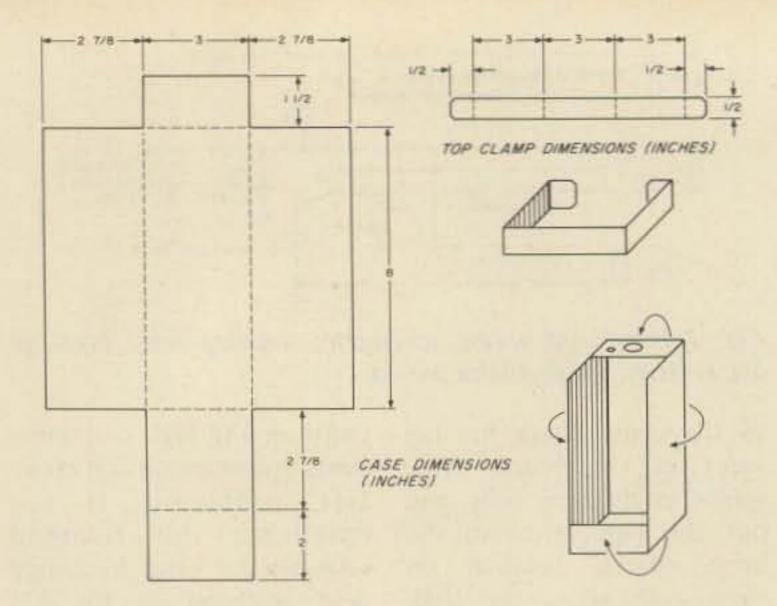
Aluminum case, clamp dimensions, and fold lines.
